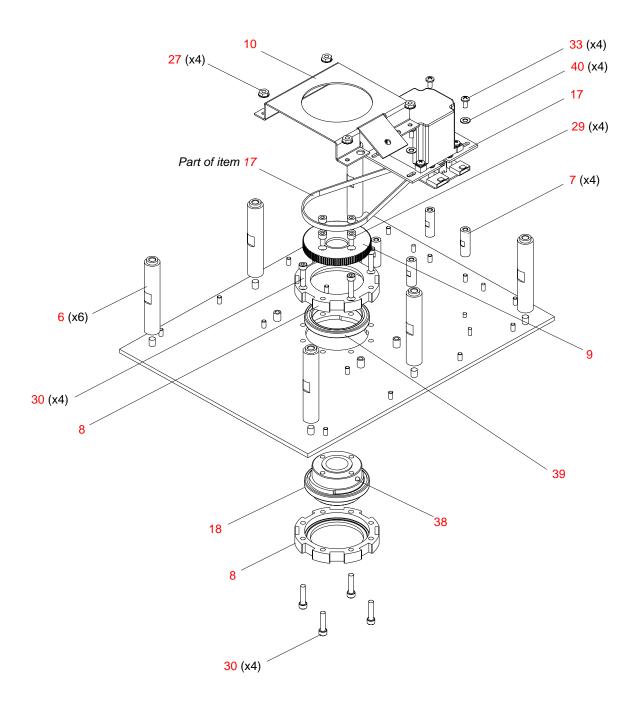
VLX3 Wash Upper Enclosure Assembly Part 1
